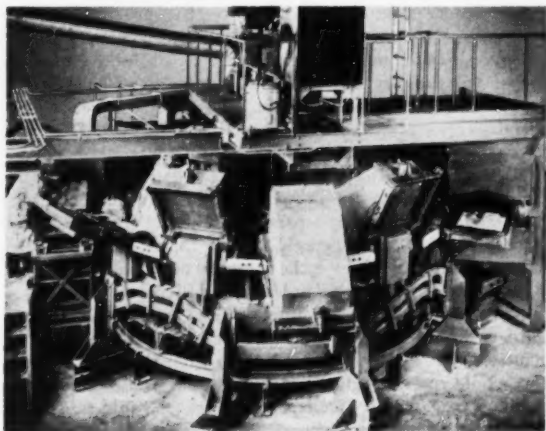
12-STATION MACHINE IS CAPABLE OF PRODUCING 500 SHELL MOLDS PER HOUR
